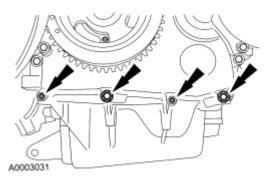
Identifying Rear Oil Pan Bolts Courtesy of FORD MOTOR CO.
